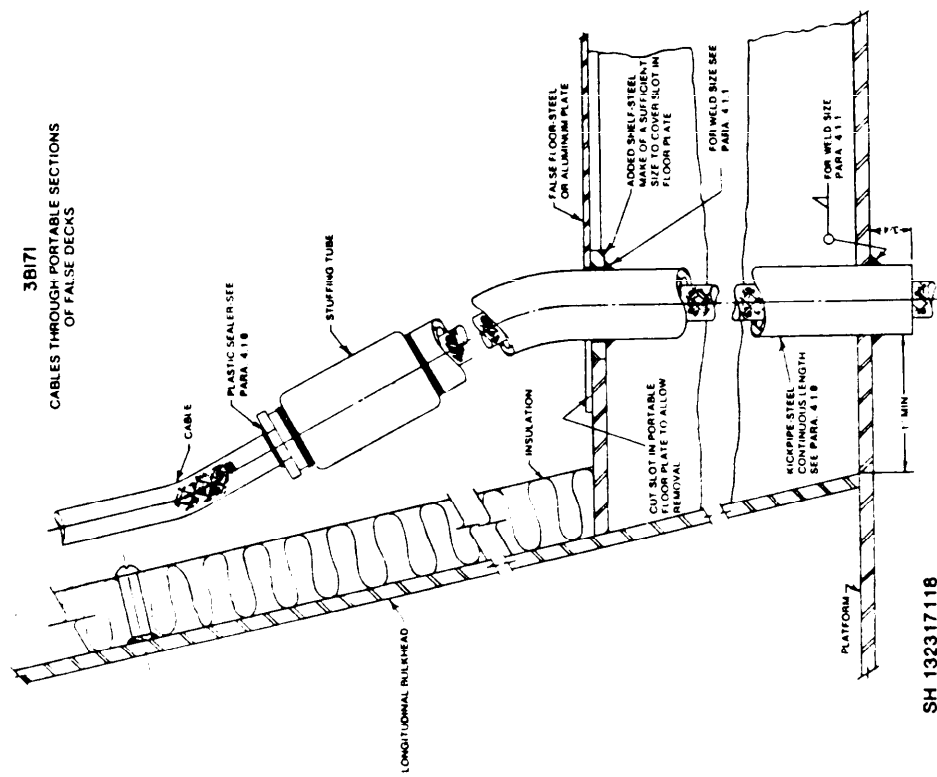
B17. Stuffing tubes through false decks (surface ships).
